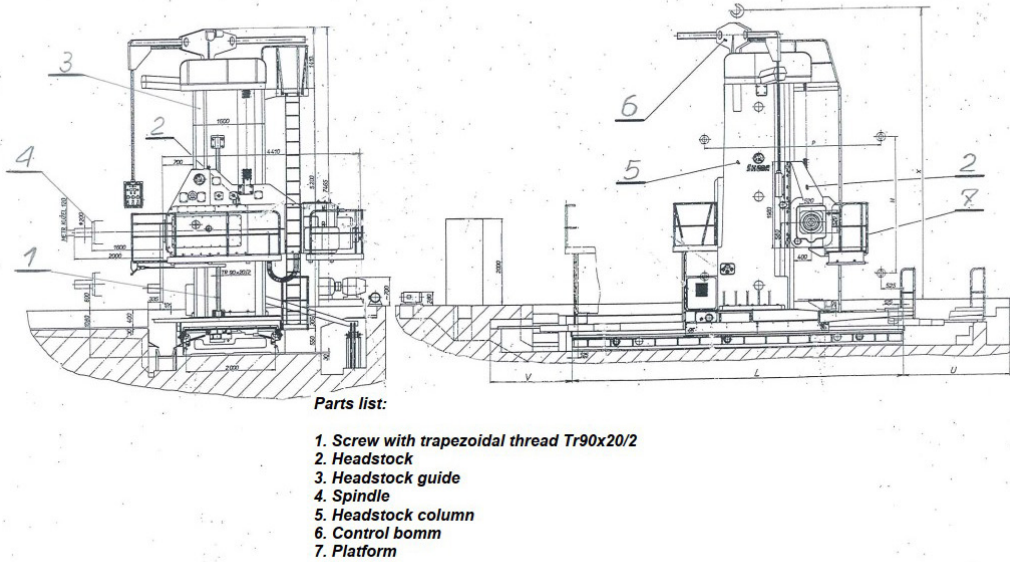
shows how a Tr90x20/2 trapezoidal threaded screw is permanently attached to the column of a drilling and milling machine, as well as illustrating the main components of this machine tool.
